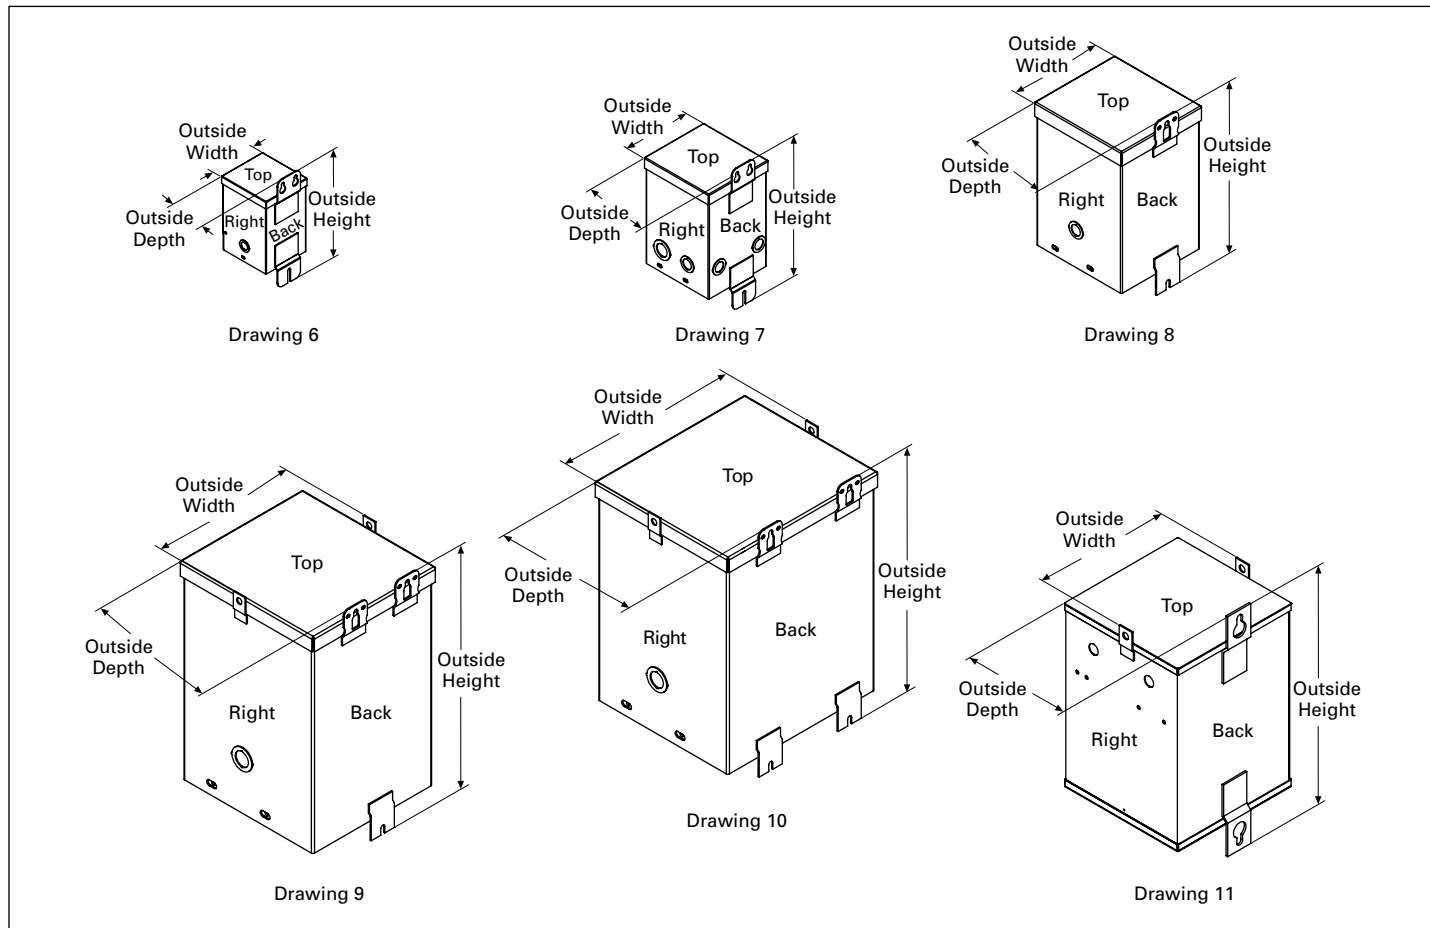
Enclosure Dimensional Drawings—Encapsulated Transformers
